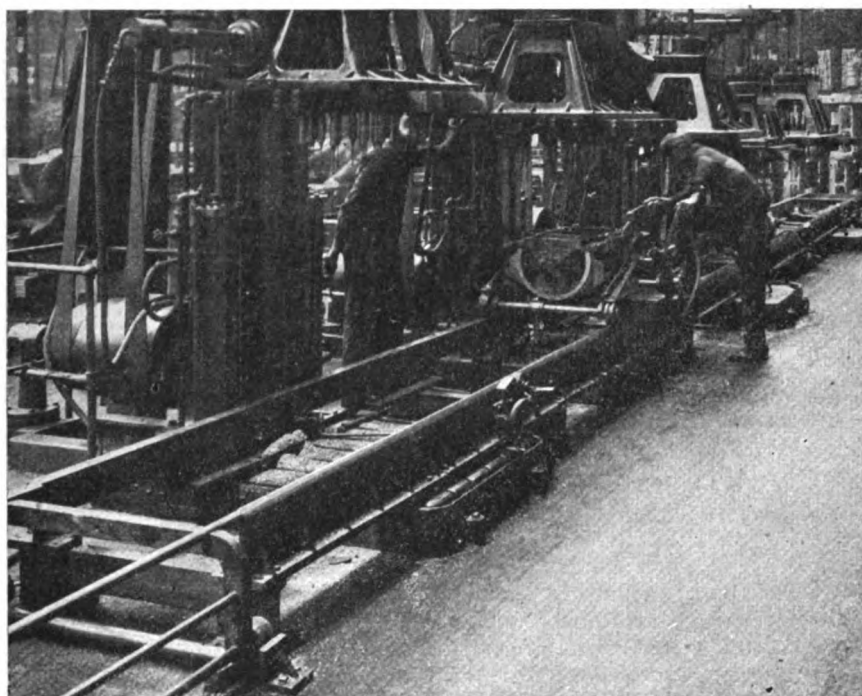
Railroad fixture which drills all holes in aluminum crankcase. This fixture is operated by two men and requires approximately 3 min. for drilling all the holes
